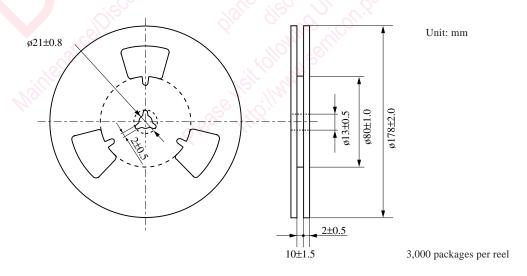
Embossed Taping Reel Dimensions for Mini Type Package
